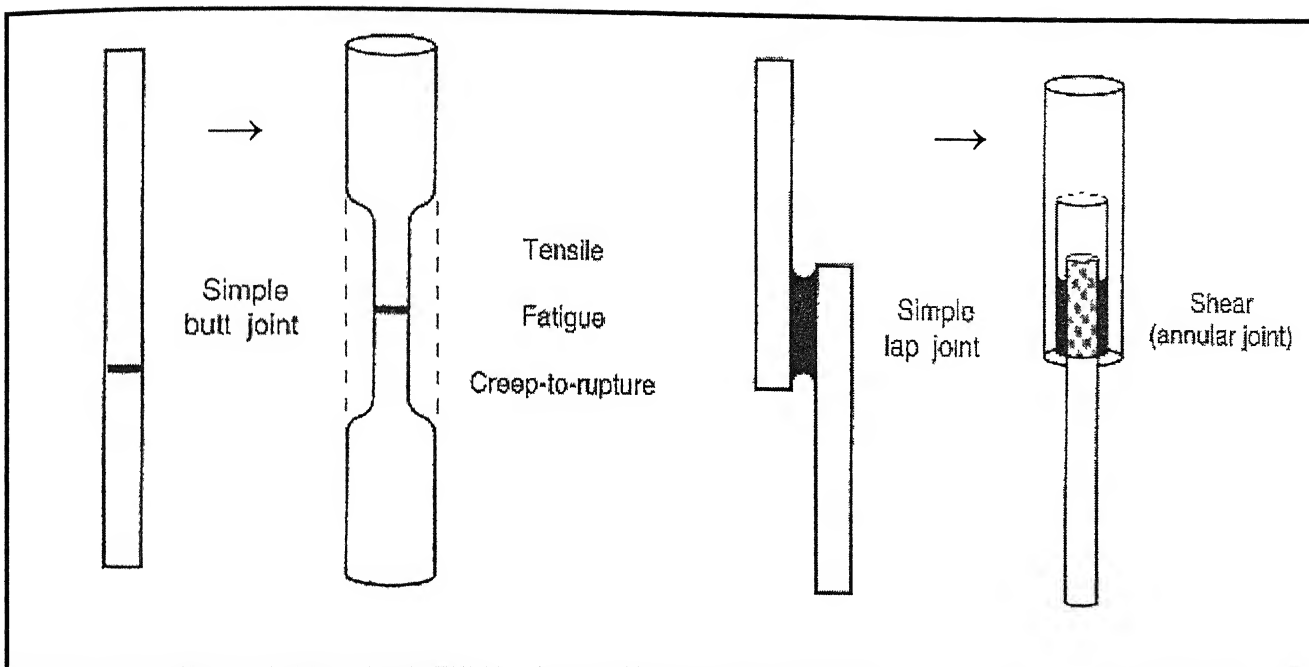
Test piece configurations based on simple butt and lap joints. ^[16]
